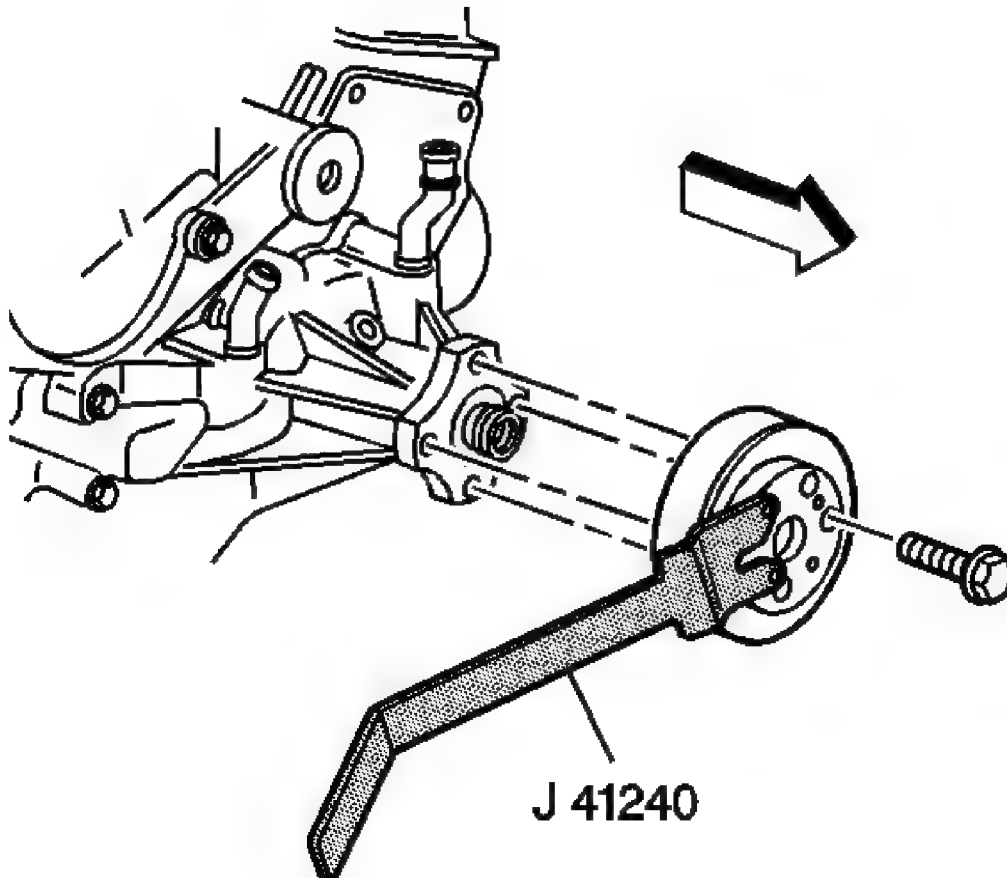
View Of Fan, Water Pump Pulley & Bolts
